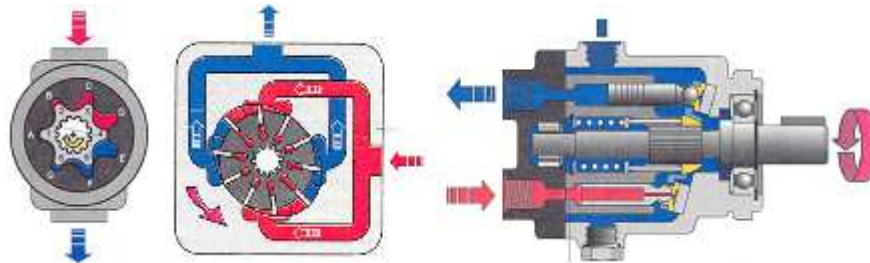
Hydraulic motors: a) Gear motor b) Vane motor c) Piston motor
